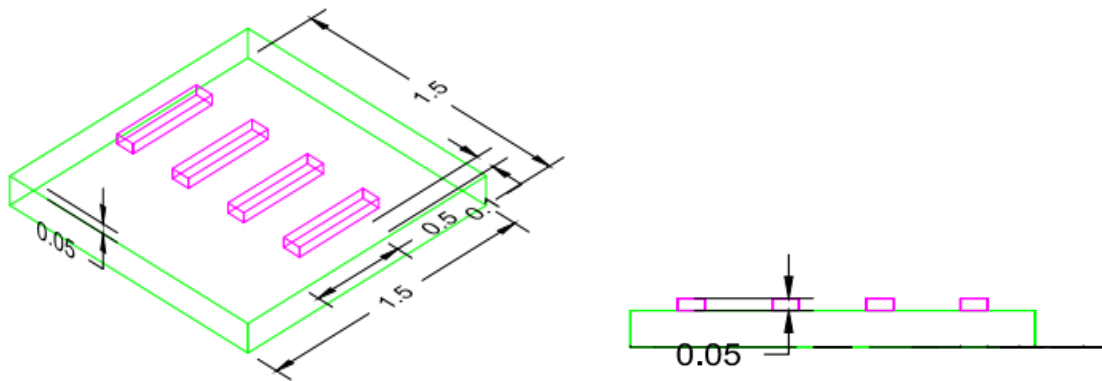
, (a) AutoCAD home view of the mold for PDMS upper cladding consisting of features for fluid channels (b) AutoCAD side view of the mold for PDMS upper cladding
